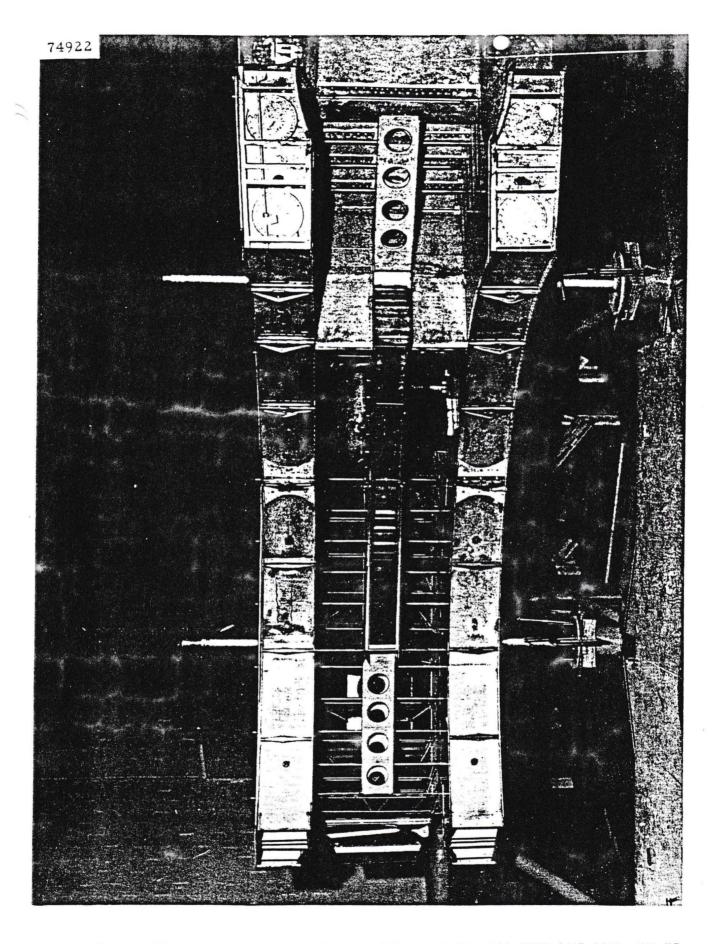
TWO INNER WING SEGMENTS AND JET PIPE ASSEMBLED IN FINAL AIRFRAME ASSEMBLY JIG
